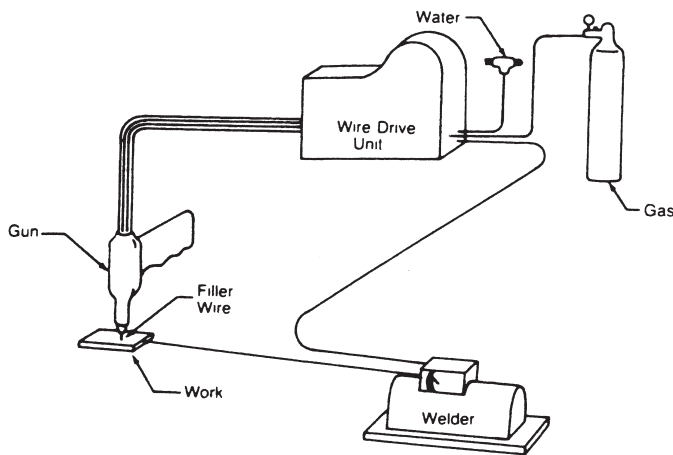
Metallic-arc inert-gas shielded welding (MIG)
